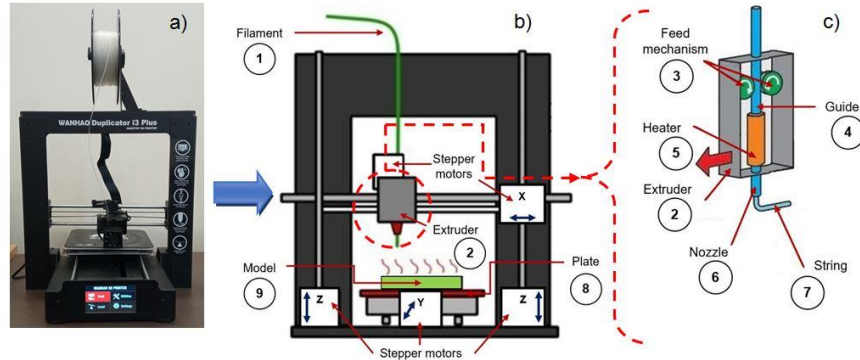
3D printer elements, type Wanhao Duplicator, i3 Plus
